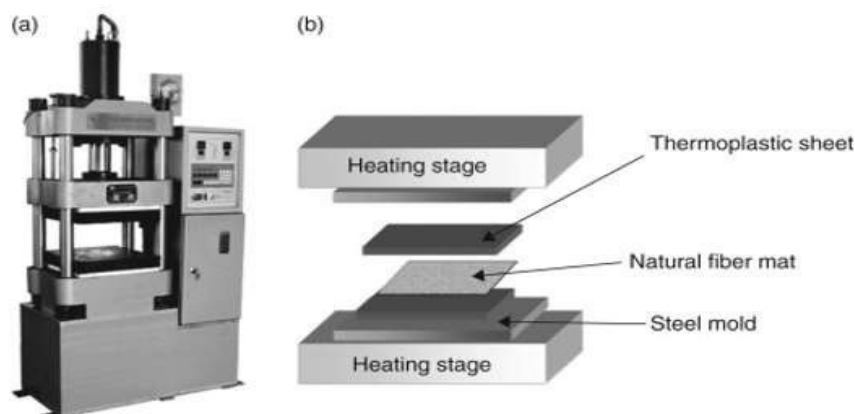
(a) Compression moulding machine, and (b) schematic compression process³³
